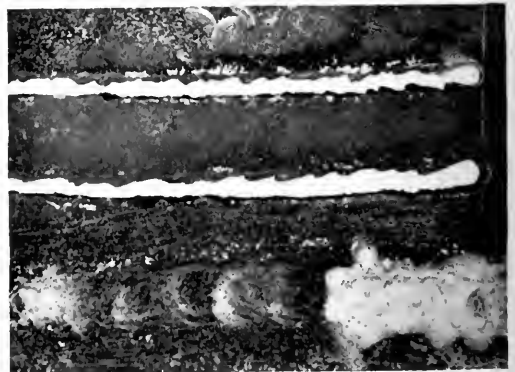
Two Pieces of Steel Plate Joined by Electric Arc Welding. Carbon Electrode Used. Also Appearance of Cuts Made by Carbon Electrode
